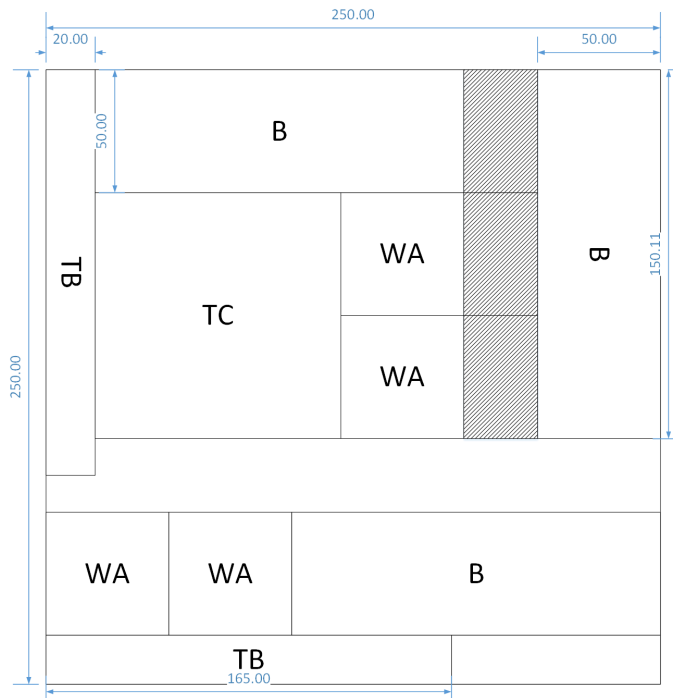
ARFRPCs Analysis Samples cutting scheme
